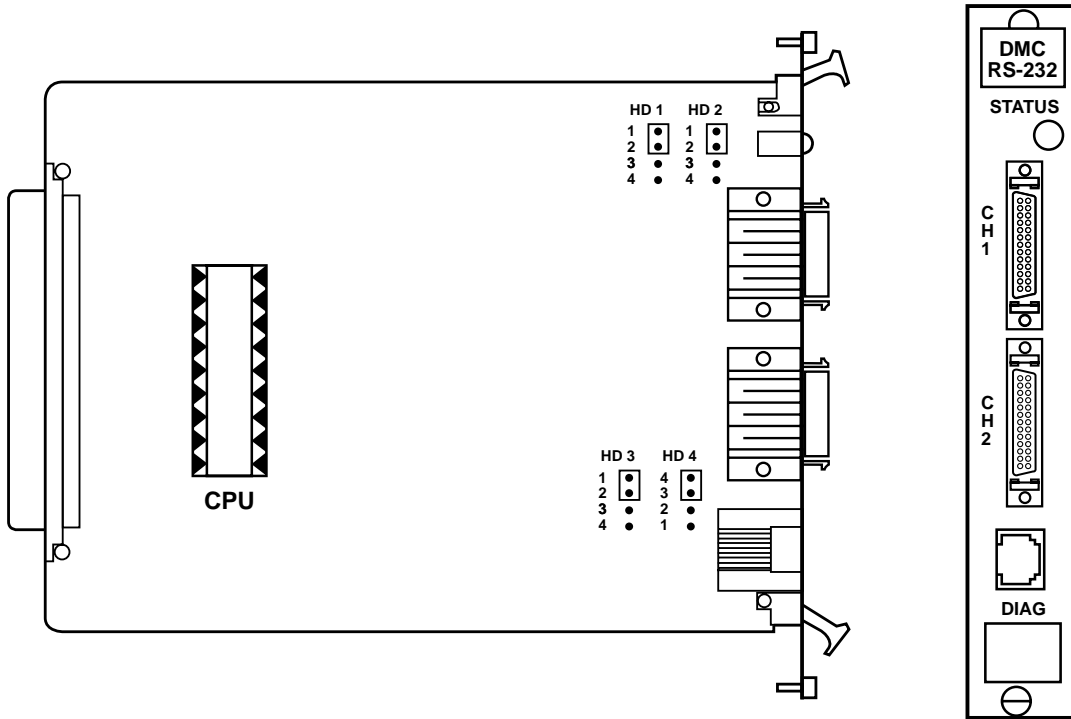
Dual Modem Rear Plug Assembly, Showing the RS-232 Card.
